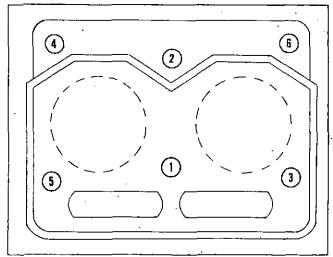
Cylinder head tightening sequence — H/NH — 4-7/8" and 5-1/8" bore
